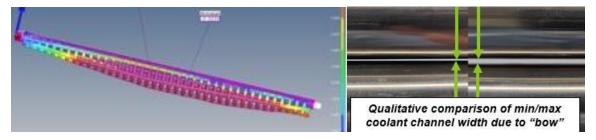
PCAT heater bowing due to end cap welding, including a (left) straightness measurement for PCAT Heater Tube #38, which failed due to heating from end cap welding, and (right) heater deformation changes in coolant channel width and modeling parameters.
